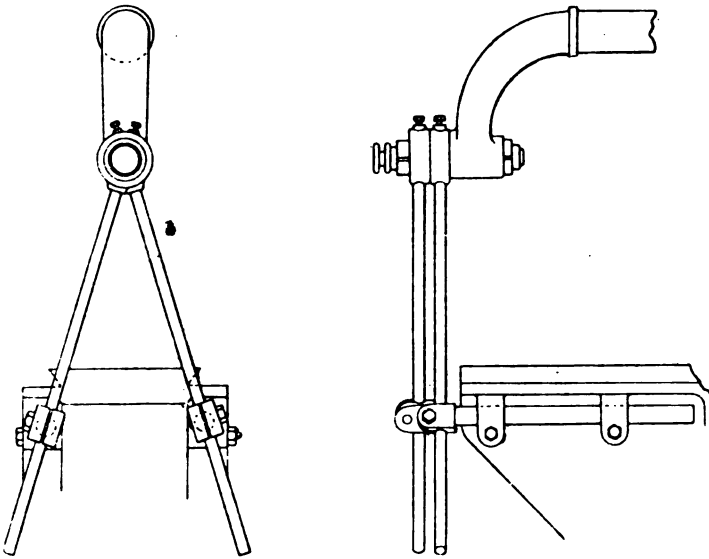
Bracing, with Rods in Clamping Bosses.
